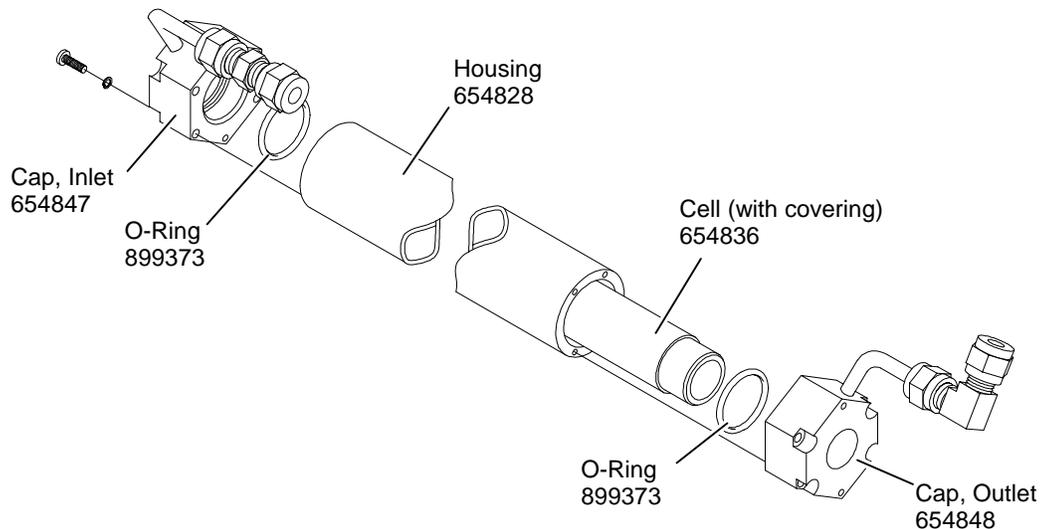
SAMPLE CELL ASSEMBLY
